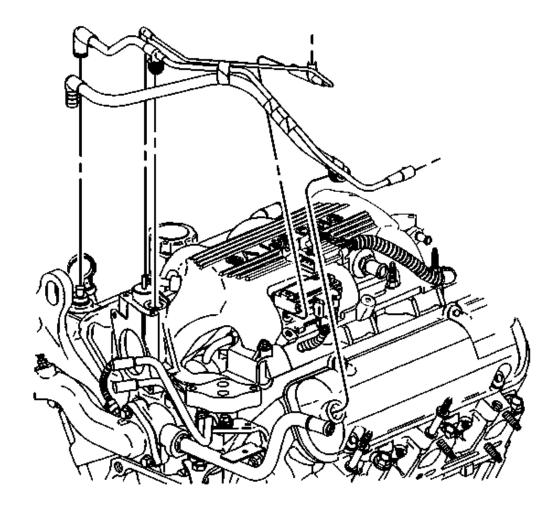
Removing/Installing Oil Level Indicator & Oil Level Indicator Tube Courtesy of GENERAL MOTORS CORP.
